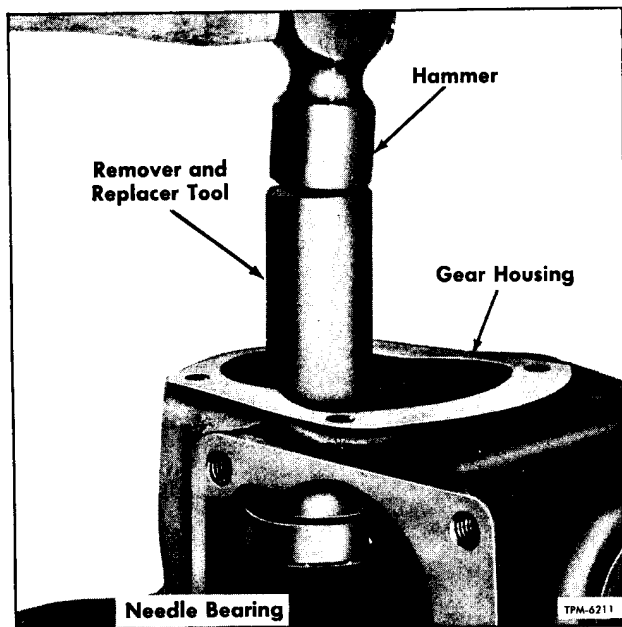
Removing or Installing Needle Bearing in Housing (Typical)
